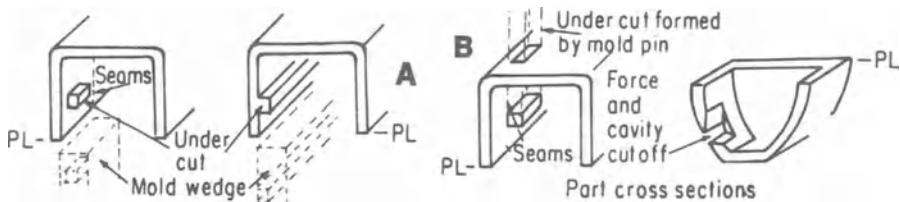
Inside undercuts can be made with removable wedges or ejector pins and ejector wedges, but seams will still show. The left view shows undercuts molded with removable wedges; the right view shows the mold knock-out pin positioned through the permissible opening in the part and cavity cutoff approaches.
